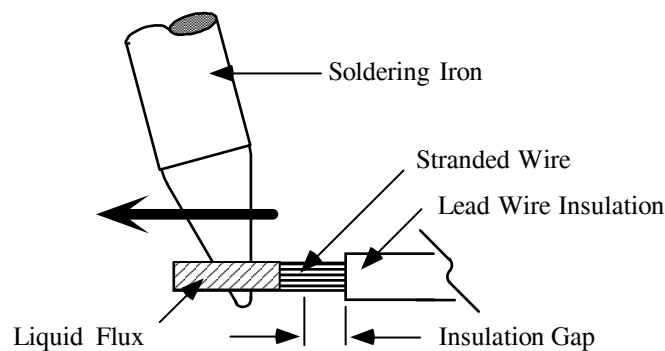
Using the Soldering Iron to Tin Insulated Leads.
